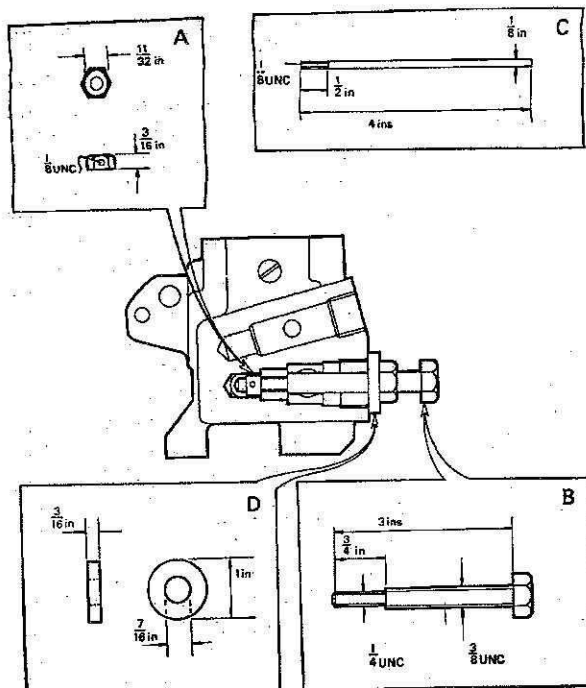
To renew non-return (check) valve seat, a tool can be fabricated to dimensions shown. Cross-sectional drawing of valve body in center view shows tool in position to remove valve seat. Pin (C) is used to position small nut (A) while puller bolt (B) is threaded into nut, then pin is unscrewed from nut. Hold bolt and turn outer (large) nut to remove seat.
